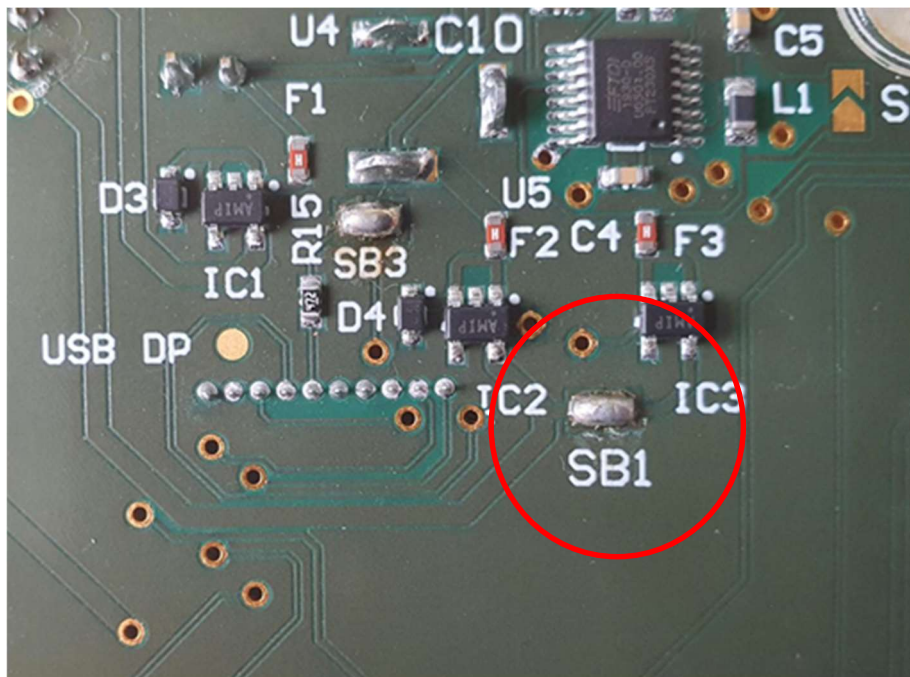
solder applied to solder bridge “SB1” to enable power over USB
